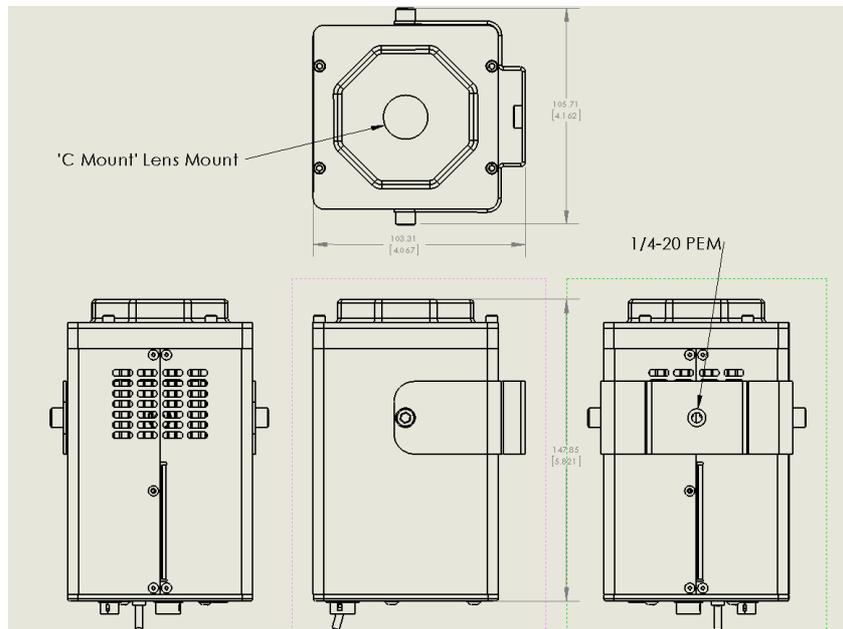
Enclosed Body with 'C' Mount Lens Mount - Side View
